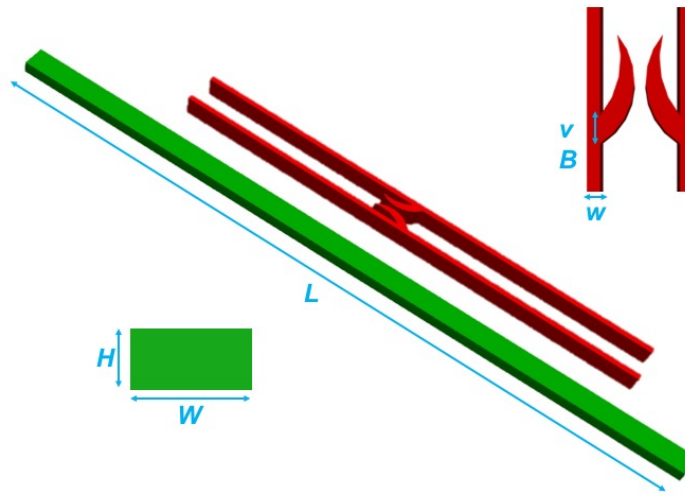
The 3D CAD drawing of the static valve structures which were printed on the 3D printer. $L = 12$ mm, $H = 2$ mm, $W = 4$ mm, $w = 0.5$ mm $vB = 1$ mm
